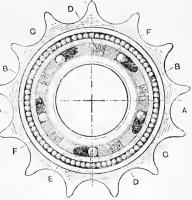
Roller or Friction-type Free-wheel Clutch : A, chain ring; B, balls; C, rollers; D, springs; F, followers
